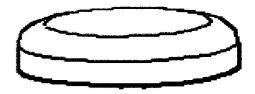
3D Design of the Rotating disc with 200mm diameter
